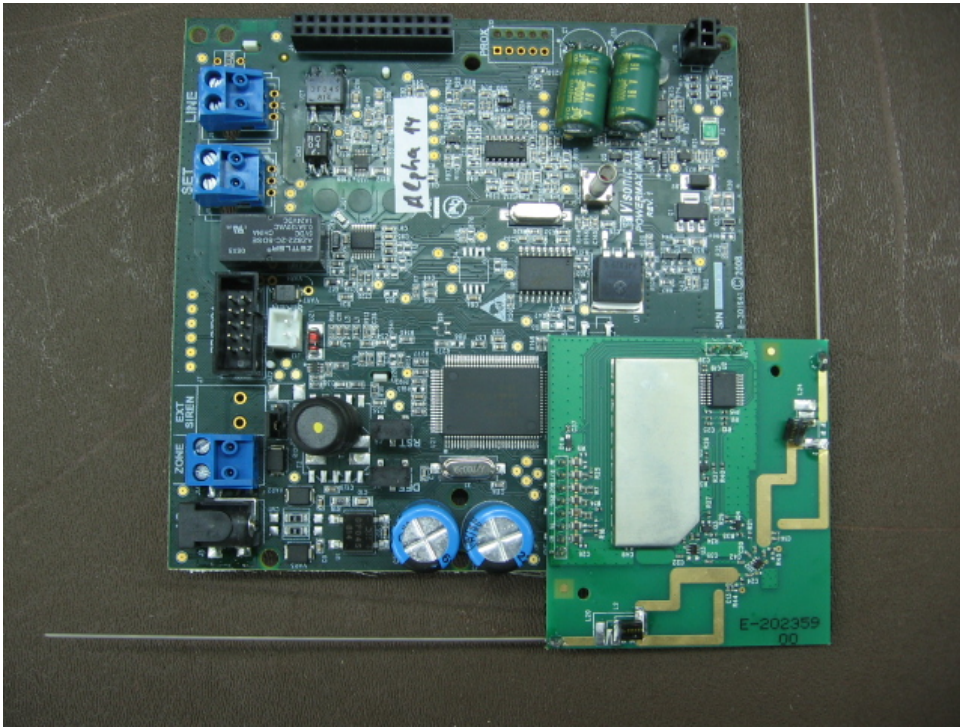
PowerMax Mini PCB and PMPRO Transceiver PCB (TOP)
